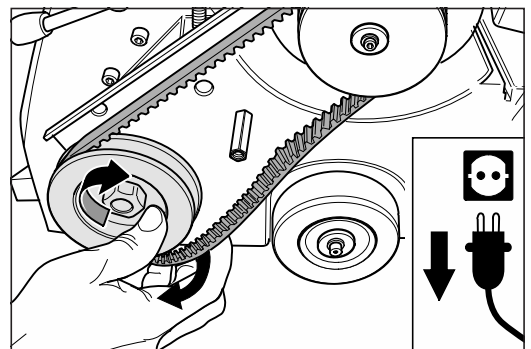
Allow the drive belt to run off the lower pulley. If necessary use the box wrench (see tool bag) to help you, but turn the box wrench exclusively in the clockwise direction in order not to loosen the nut of the lower pulley.
